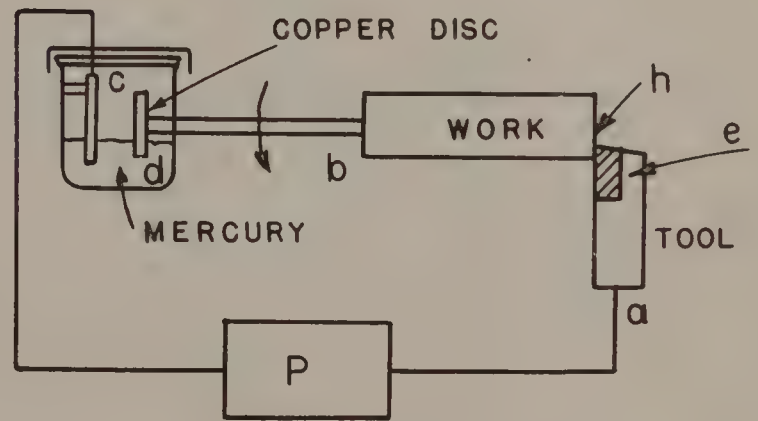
Tool-chip thermocouple method of measuring mean cutting tool temperature.
